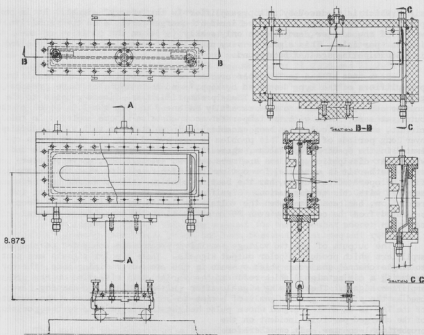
Assembly Drawing of Complete Counter.
